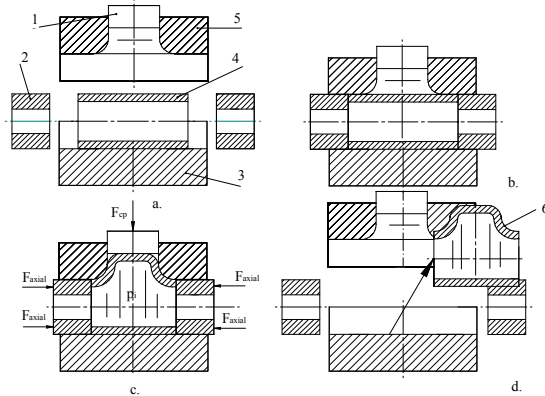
T Tube hydroforming process: 1 - counter punch; 2 - axial punches; 3 - inferior die; 4 - tube; 5 - superior die; 6 - part; a. feeding; b. die closing; c. pressurization and axial feeding of punches; d. part removal
